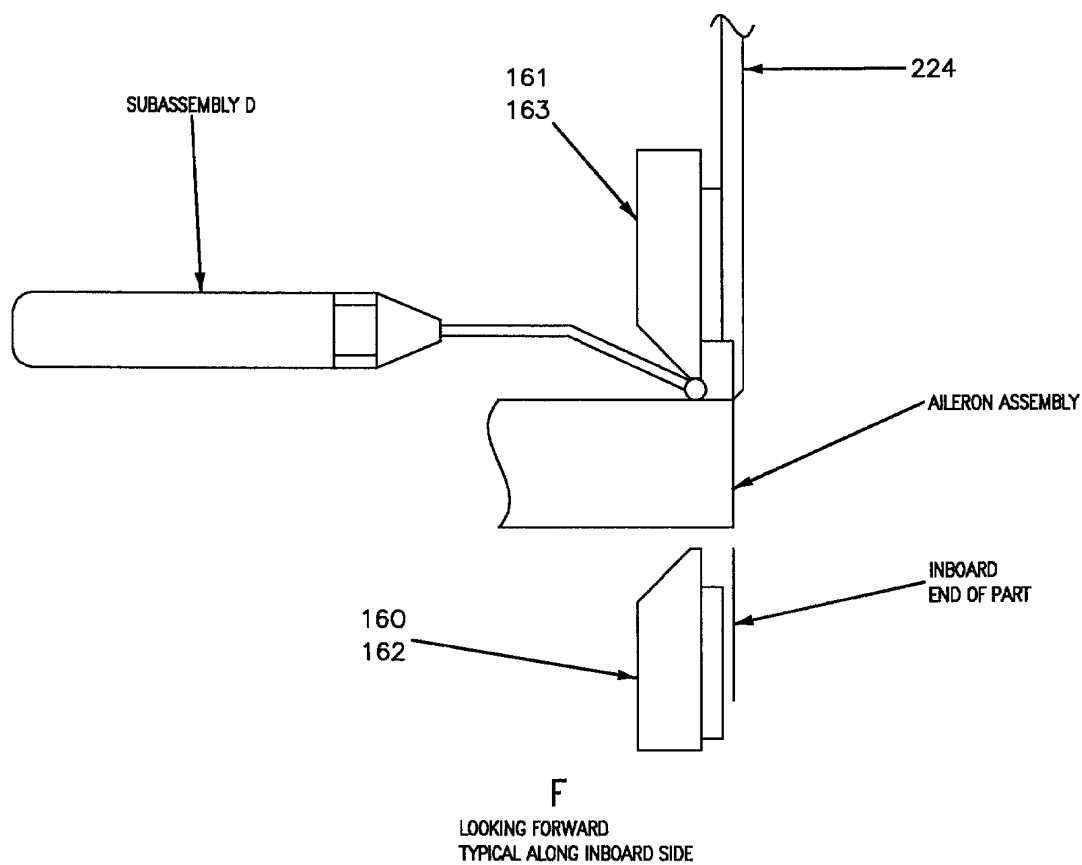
Loading Aileron Assembly into Maintenance Fixture (Sheet 4)
